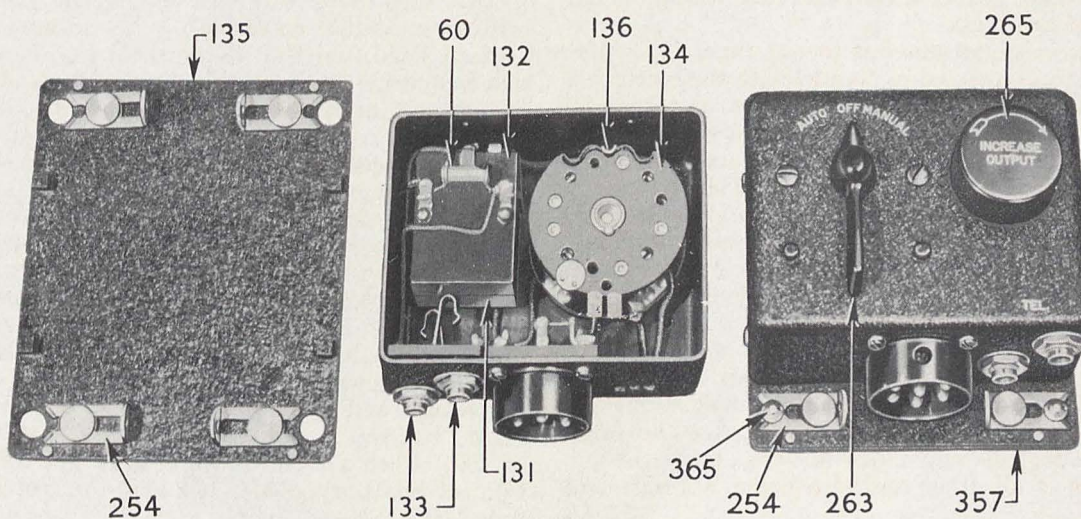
RADIO CONTROL BOX, TYPE BC-AH-231 WITH BASE REMOVED AND WITH BASE AND MOUNTING, TYPE FT-118 IN PLACE
